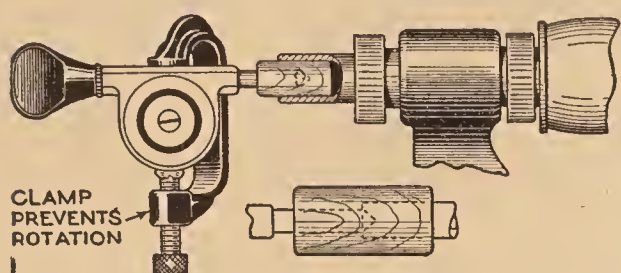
REVOLUTION COUNTER PLUGGED IN REAR END OF LATHE SPINDLE
